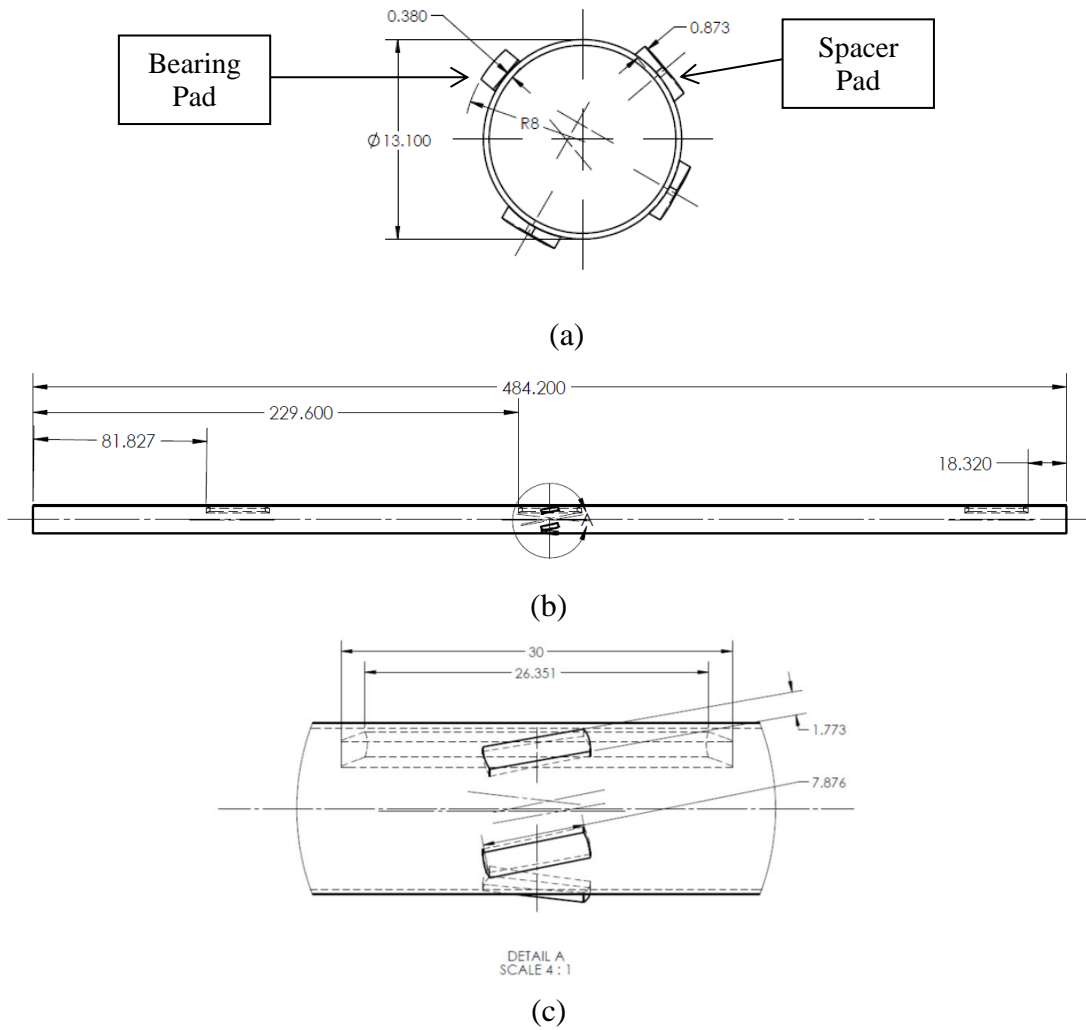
Dimensioned drawings of (a) the sheath cross-section, (b) the fuel sheath, and (c) the brazed appendages. All measurements are given in mm.
